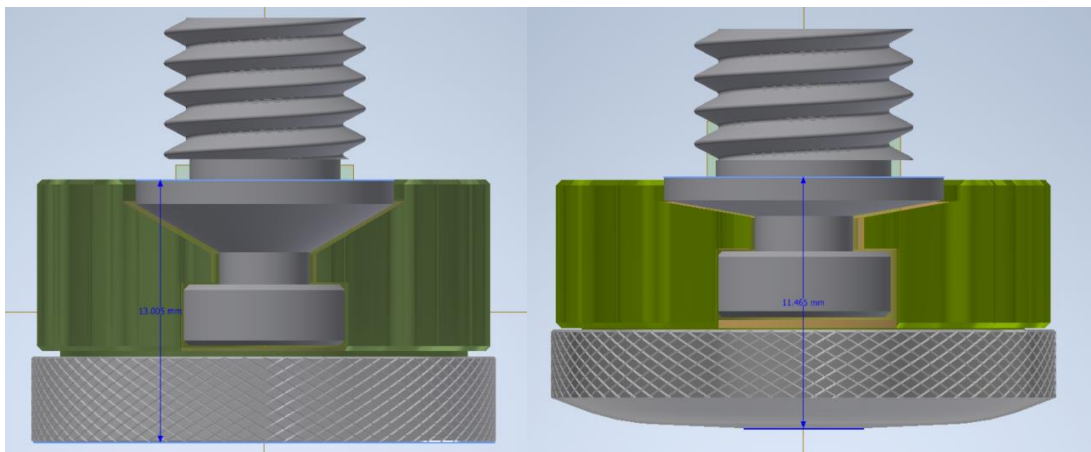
Side-view of shortened QuickPin design. Left: old design. Right: new design.
